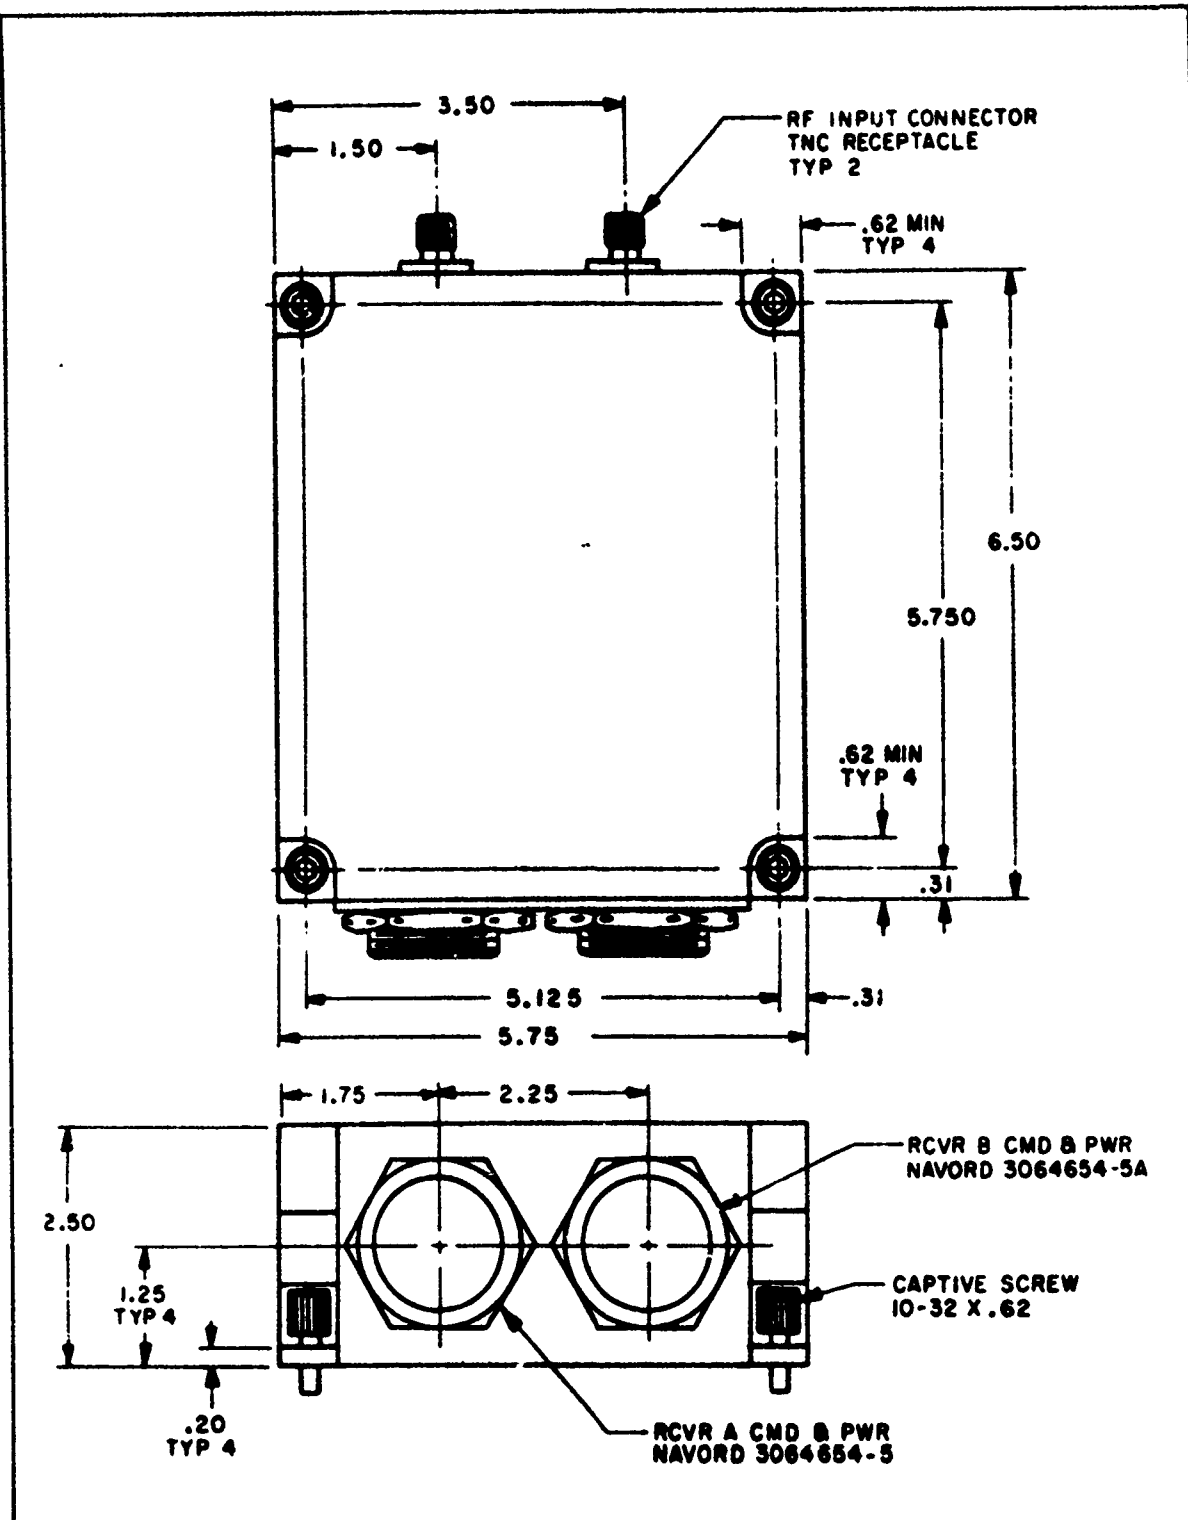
Outline drawing of LC Model CDR-222 Flight Termination Receiver.
